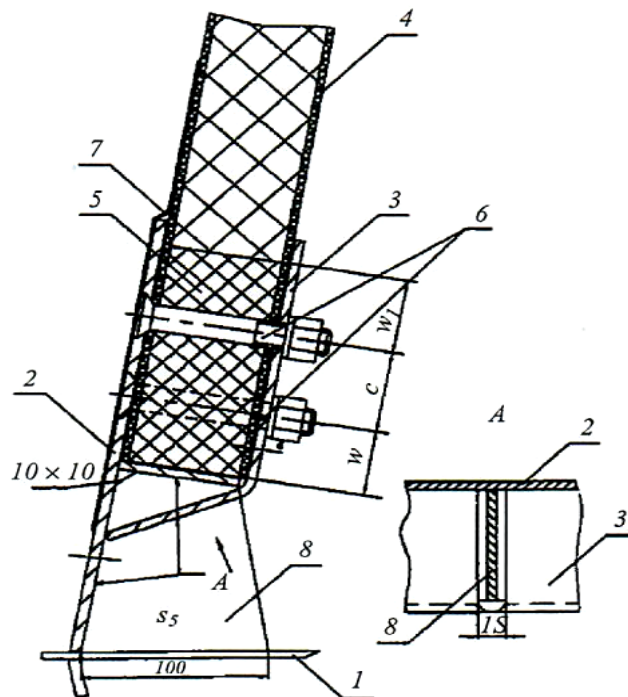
Bonded and bolted joint of superstructure's side panels to the metal hull:
